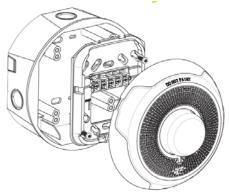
4-Wire Ceiling Mount Horn Strobes with Ceiling Surface Mount Backbox
